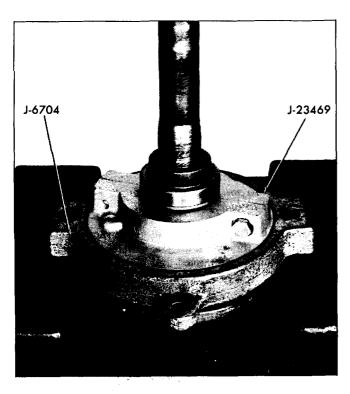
A-12 Pressing Off Axle Bearing (A and G Series)
